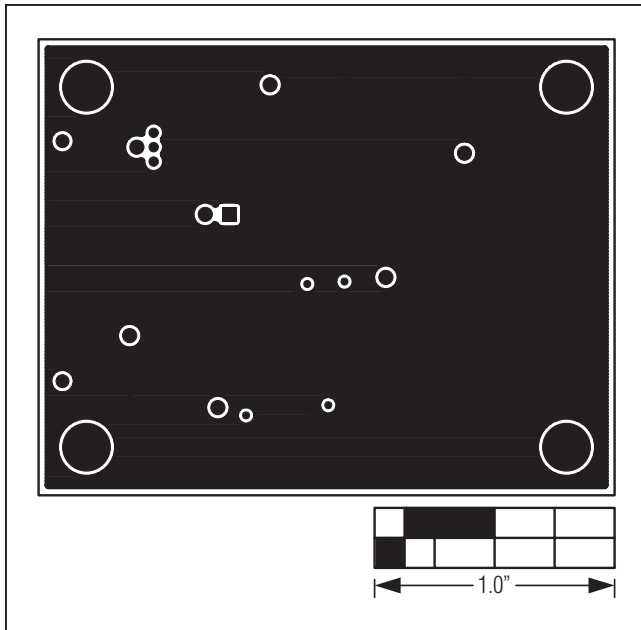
MAX16907 EV Kit PCB Layout—Layer 3
